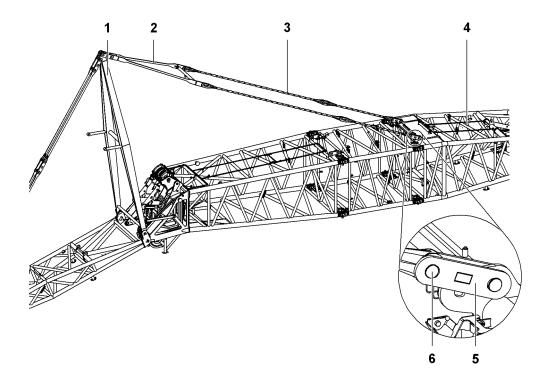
Bolting the equaliser on A-frame 2 to the main boom
